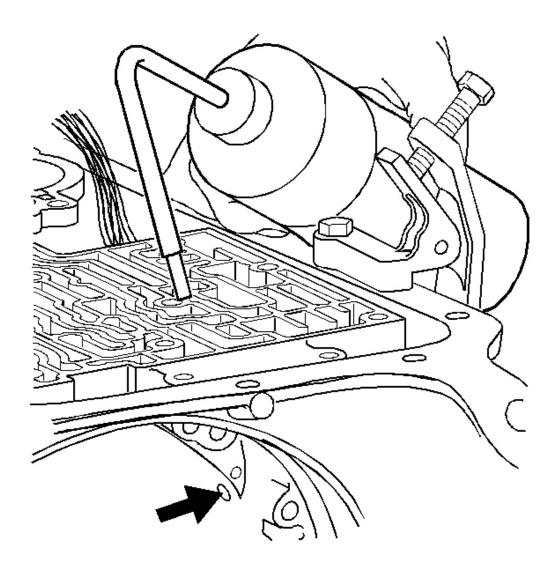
Identifying J 29714-A Courtesy of GENERAL MOTORS CORP.
